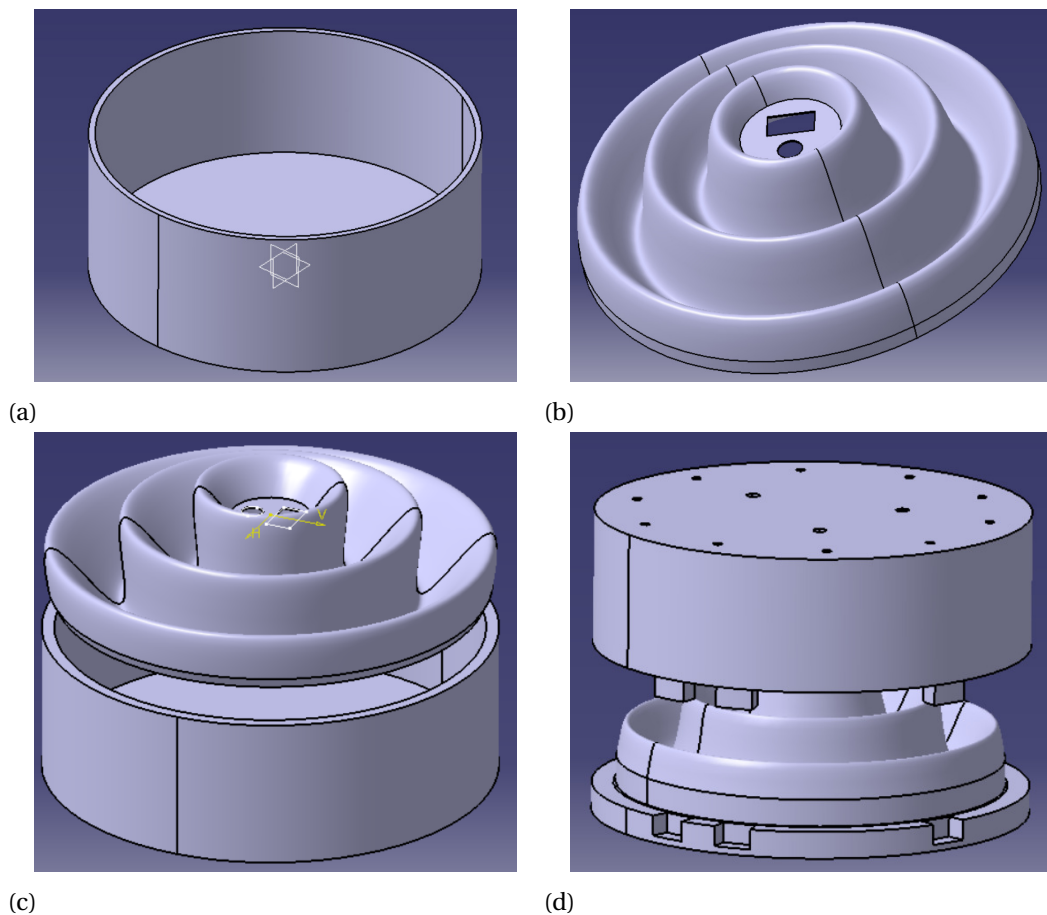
Components composing enclosed space inside the printing chamber for pressure control. a) Transparent solid cylindrical chamber design. b) Silicon cover design. c) Schematic of the cover going on top of the cylindrical chamber. d) Cover mould design.
